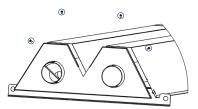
End cap burner side fasten as shown M5 set pins and washers
